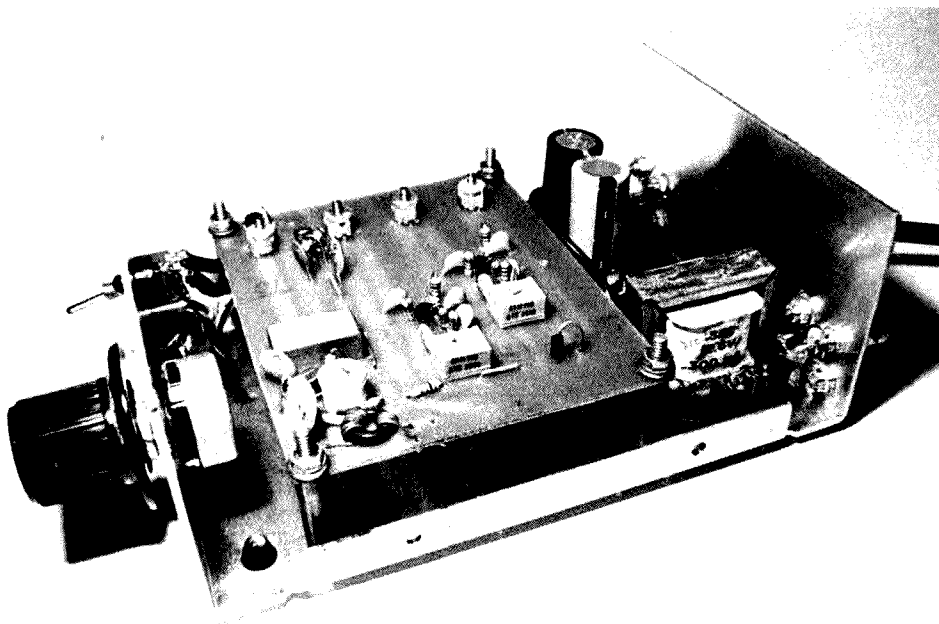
Photo B. Inside view of the converter showing PCB mounted on standoffs.
